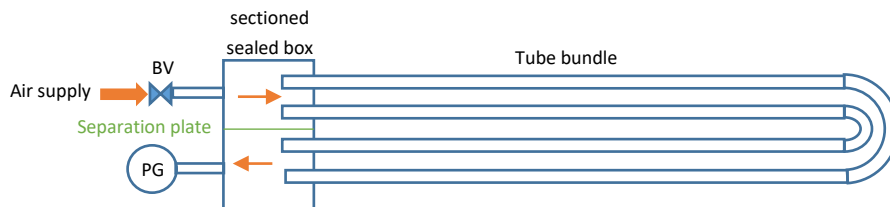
TUBE BUNDLE LEAKAGE TEST
